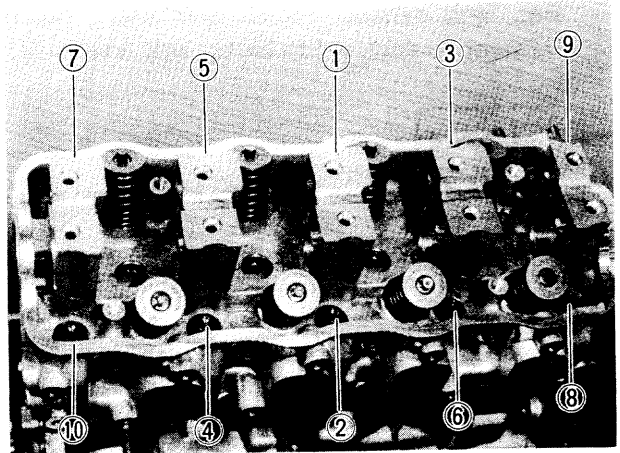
Tightening sequence of cylinder head bolts
